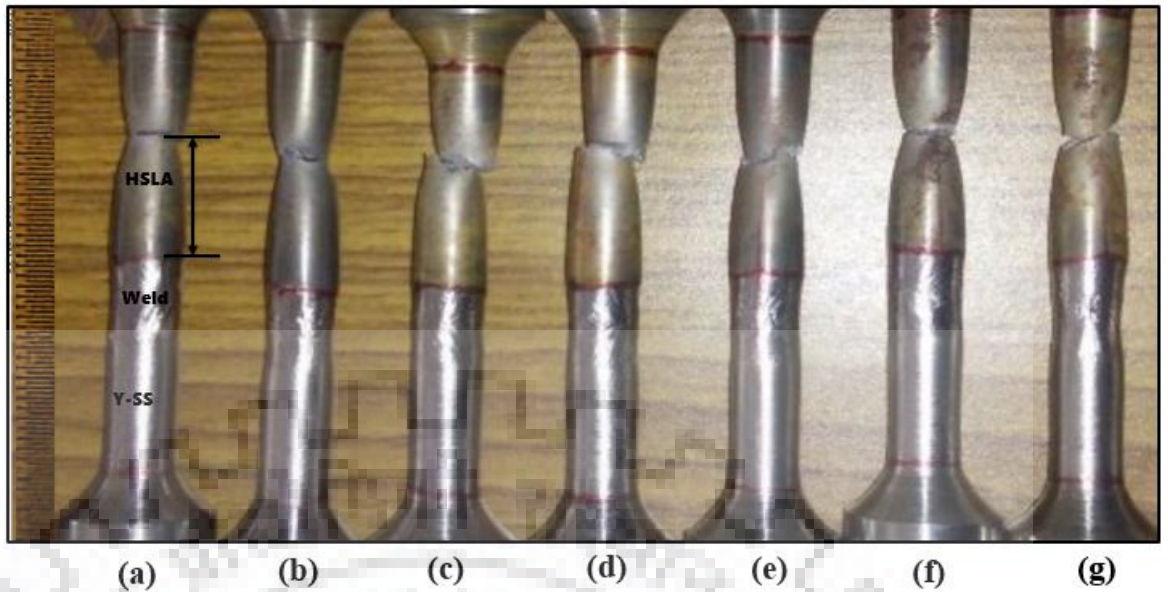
Typical location of fracture under tensile loading on axial weld test of MPMSPL conventional groove weld joint and MPSSPL narrow gap P-GMA weld joint at different ϕ and I_m of (a) UNG, 0.05 and 200A (b) UNG, 0.25 and 200A, (c) UNG, 0.05 and 220A, (d) UNG, 0.25 and 220A, (e) UNG, 0.05 and 240A (f) UNG, 0.25 and 240A and (g) CG, 0.05 and 220.
